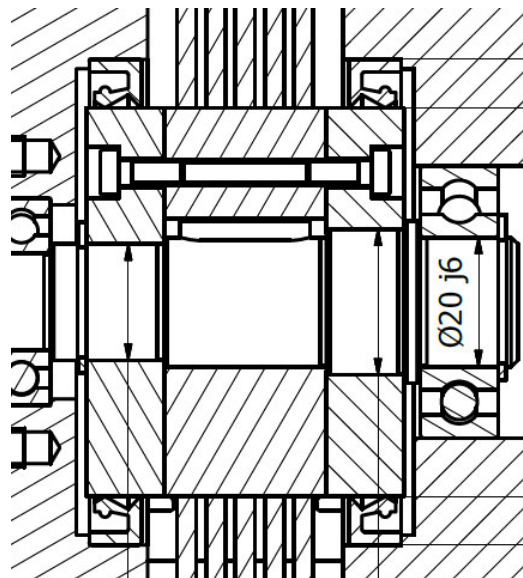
Rotary shaft seals to separate bearing seat area from powder metering area dust free.
